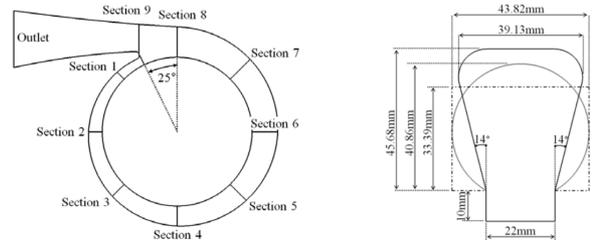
Shape and cross-sections at throat of spiral casing⁽⁵⁾
